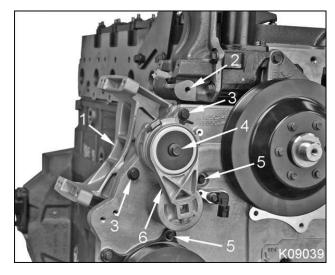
Alternator bracket, belt tensioner, and single idler pulley bolt locations
